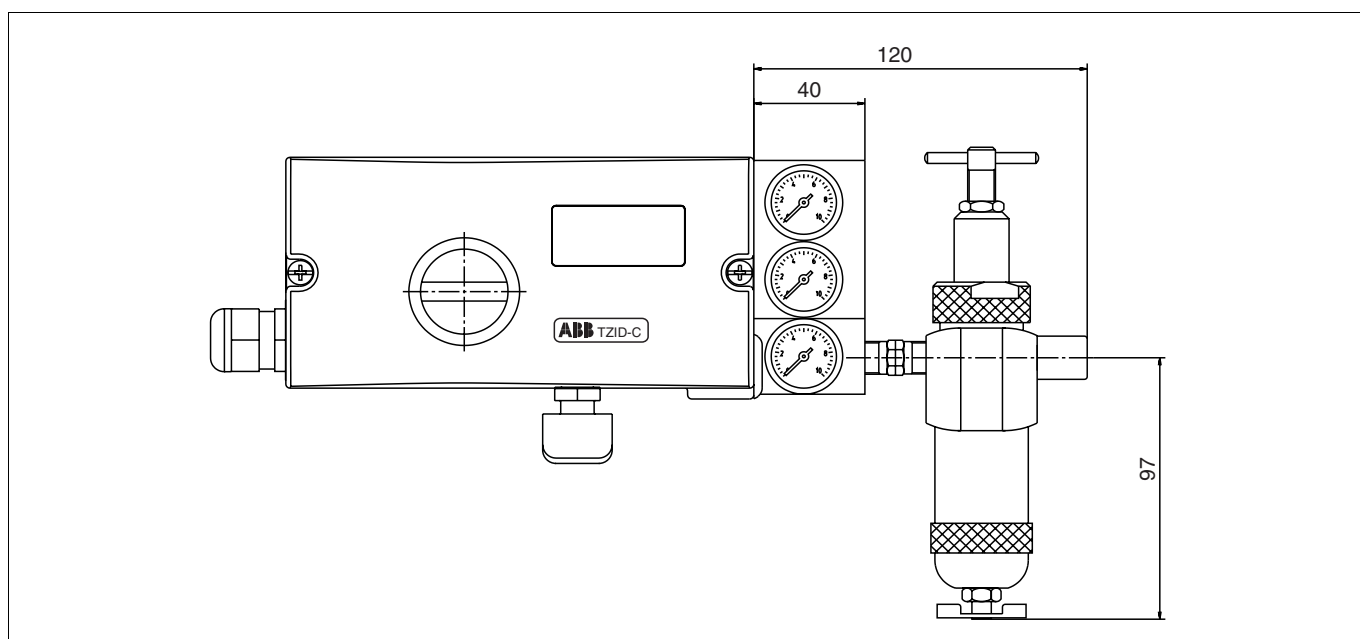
Positioner TZIDC-110 with pressure gauge block and filter regulator
